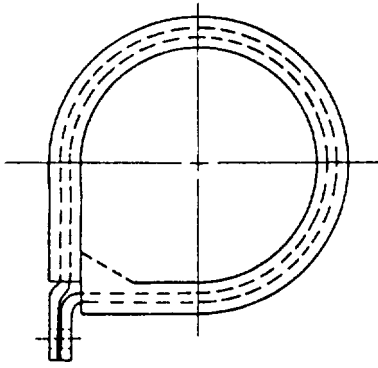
Cushioned steel clamp MIL-C-85052.
